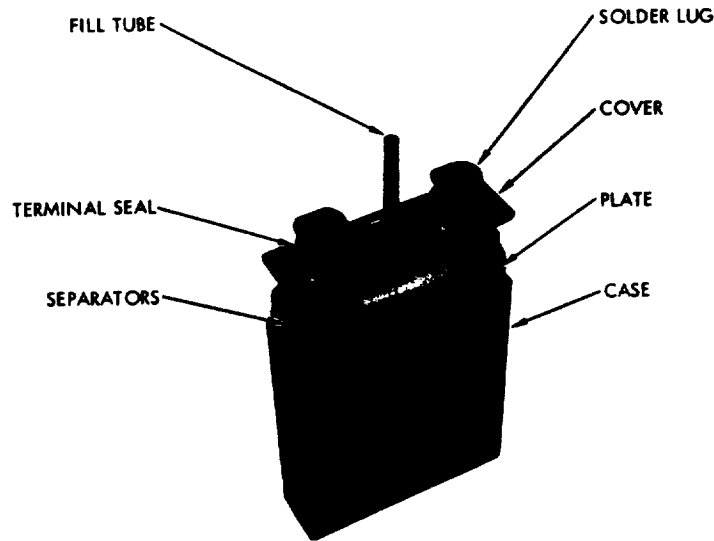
Hermetically sealed nickel-cadmium cell mechanical assembly.
